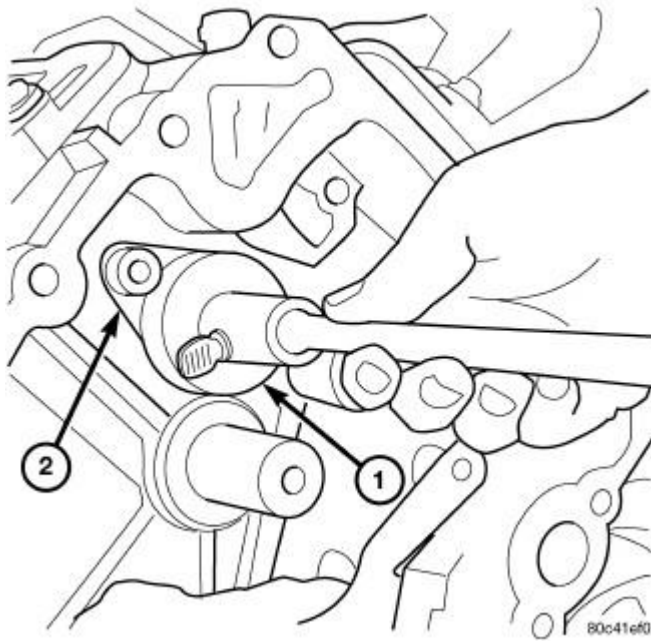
Removing/Installing Counterbalance Shaft From Engine
